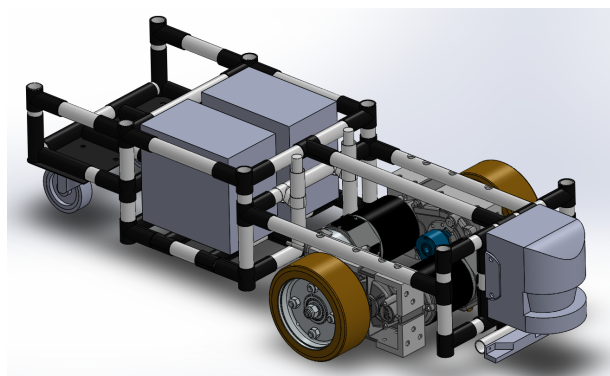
Two drive wheels configuration, AGV 3D model perspective view
